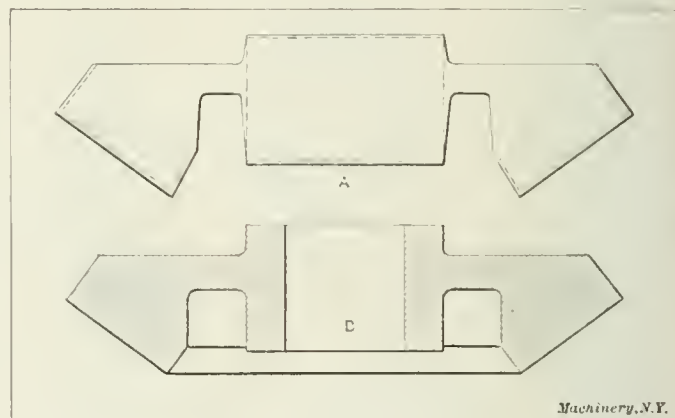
Templet with Shrinkage, Draft and Finish Allowances added, used in turning out the Impression in a Die for a Bevel Gear Blank. B shows the Finished Gear Forging after being machined
